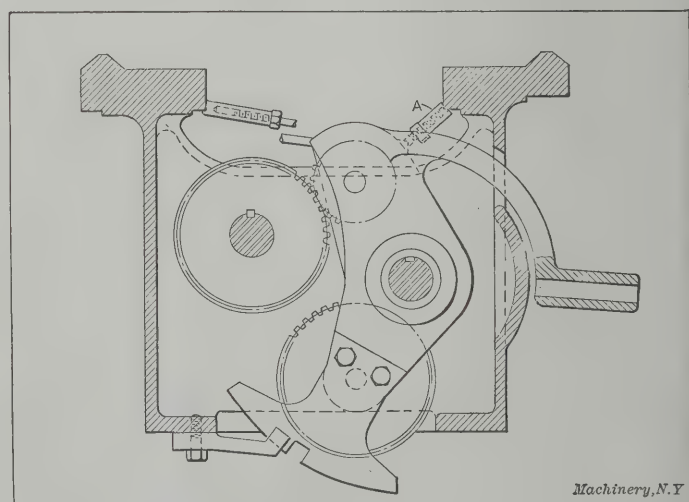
Method of Holding Tumbler when Drilling and Reaming the Locking Pin Holes by the Method shown in Fig. 8
